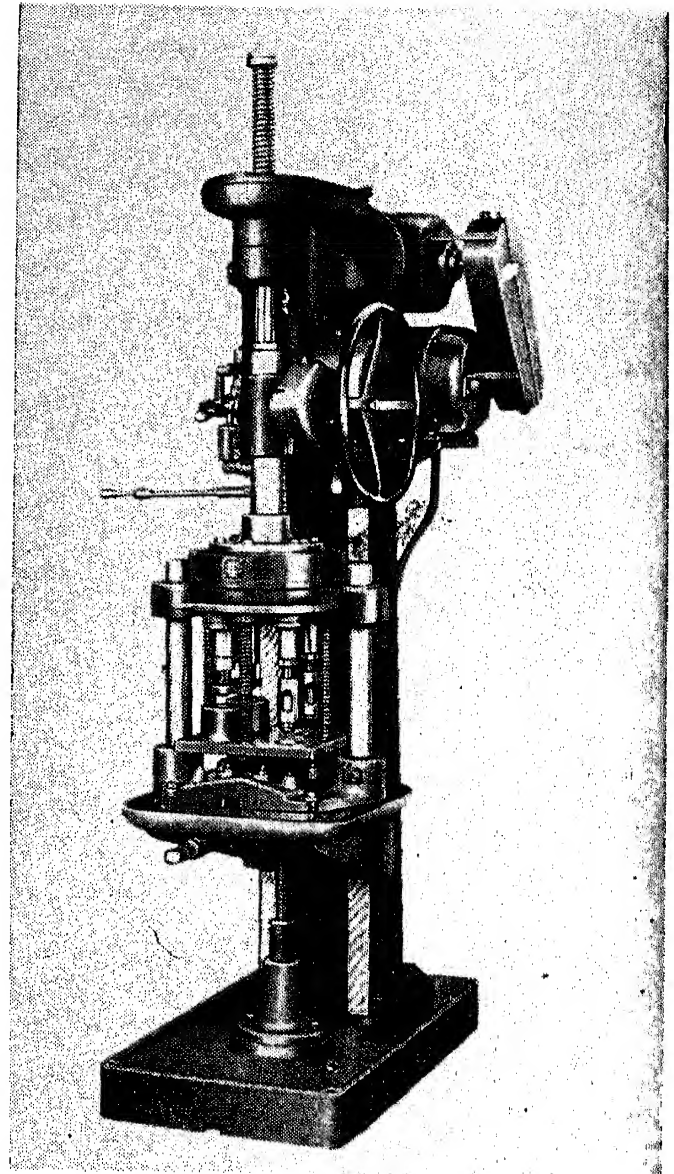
A single spindle production drilling machine with a four spindle auxiliary head and jig with pressure plate. This machine has special tooling for counterboring, countersinking, and tapping two spark plug holes in a cast iron cylinder head cover. (Courtesy Barnes Drill Co.)
